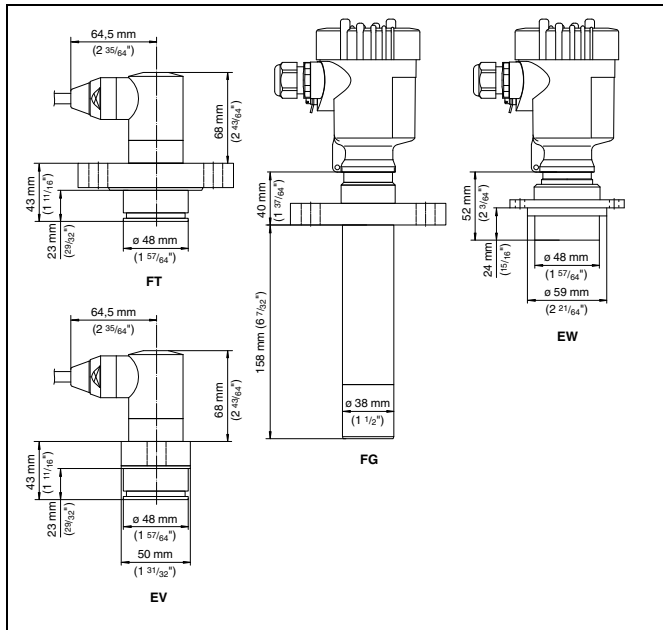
VEGABAR 64 - extension fitting for paper industry: EV/FT = absolutely flush for pulper (EV 2-times flattened), FG = extension for ball valve fitting, EW = flange for manometer lug
